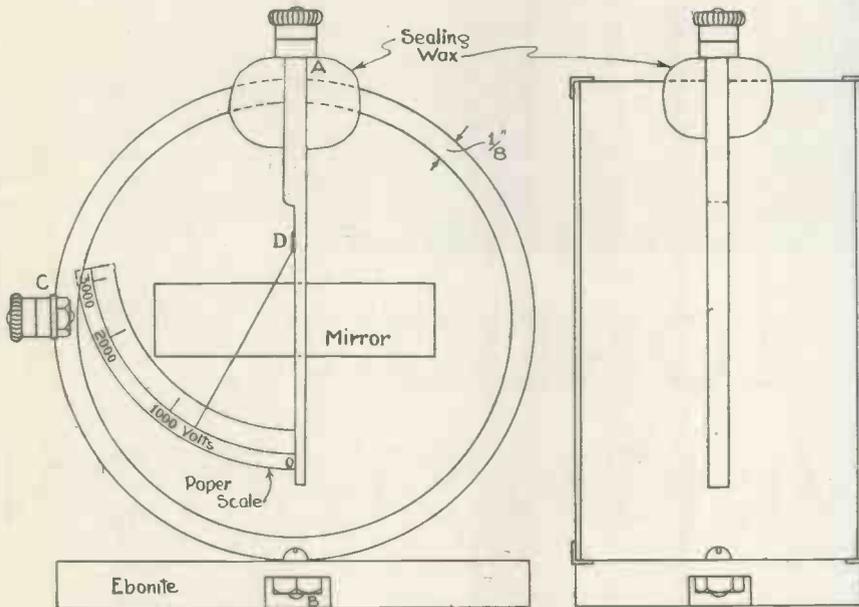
Front and side elevations of the electrostatic voltmeter showing details of construction.
